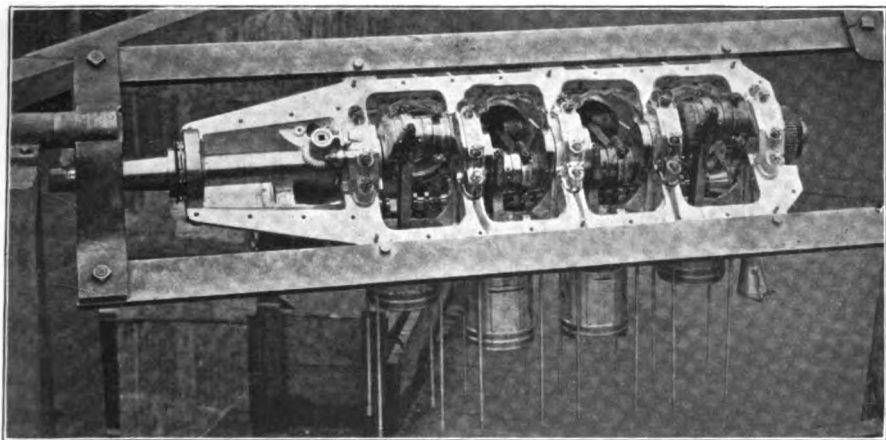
Upper half of crankcase, showing four bolts, caps, key in bearing, and also bearings fitted to mandrel.
